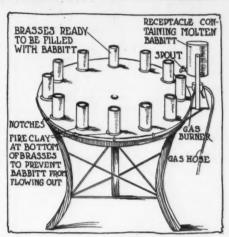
TURNTABLE FOR A RE-BABBIT-TING BEARINGS
